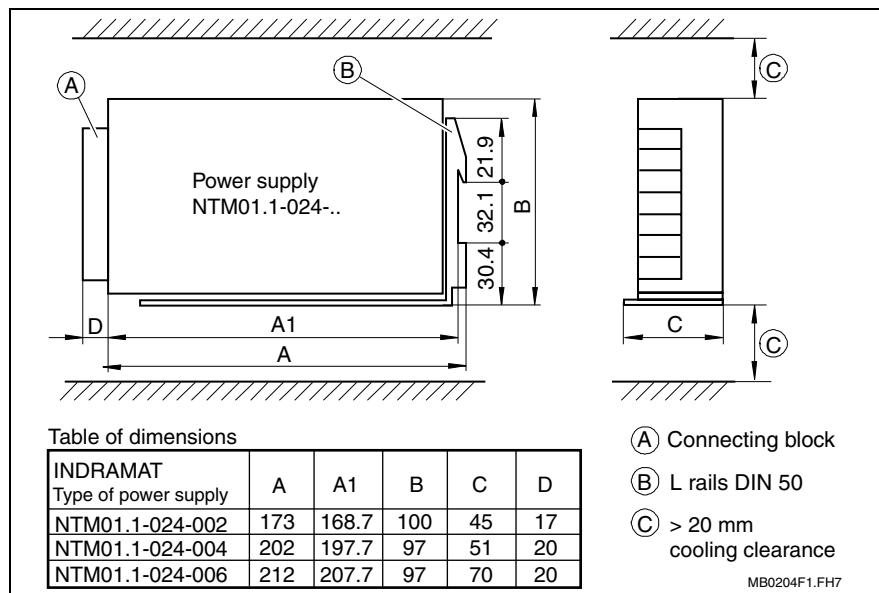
Dimensional sheet DC24V – NTM power supplies
